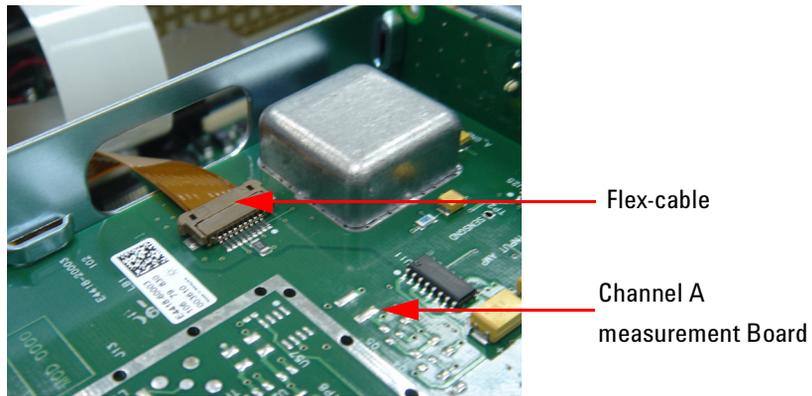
Connected Flex-Cable to Channel A measurement Board
